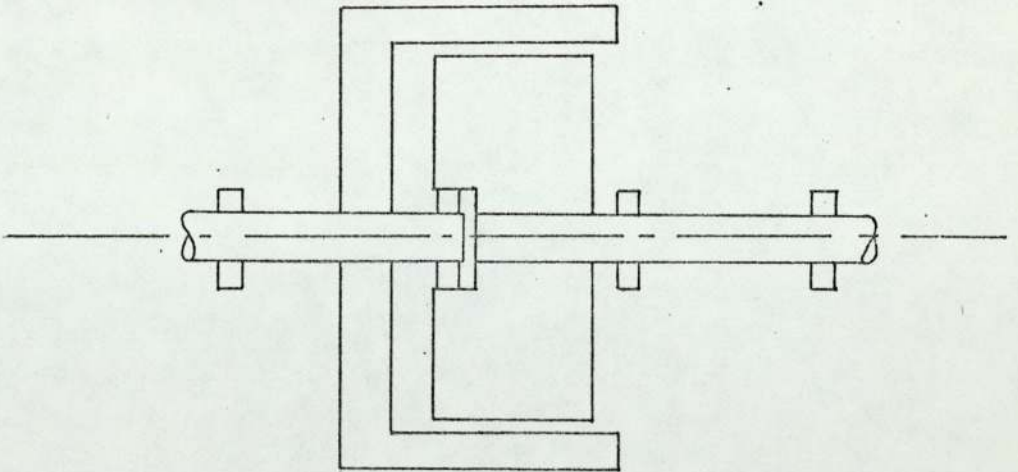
Primitive Drum Machine with Pilot Bearing
